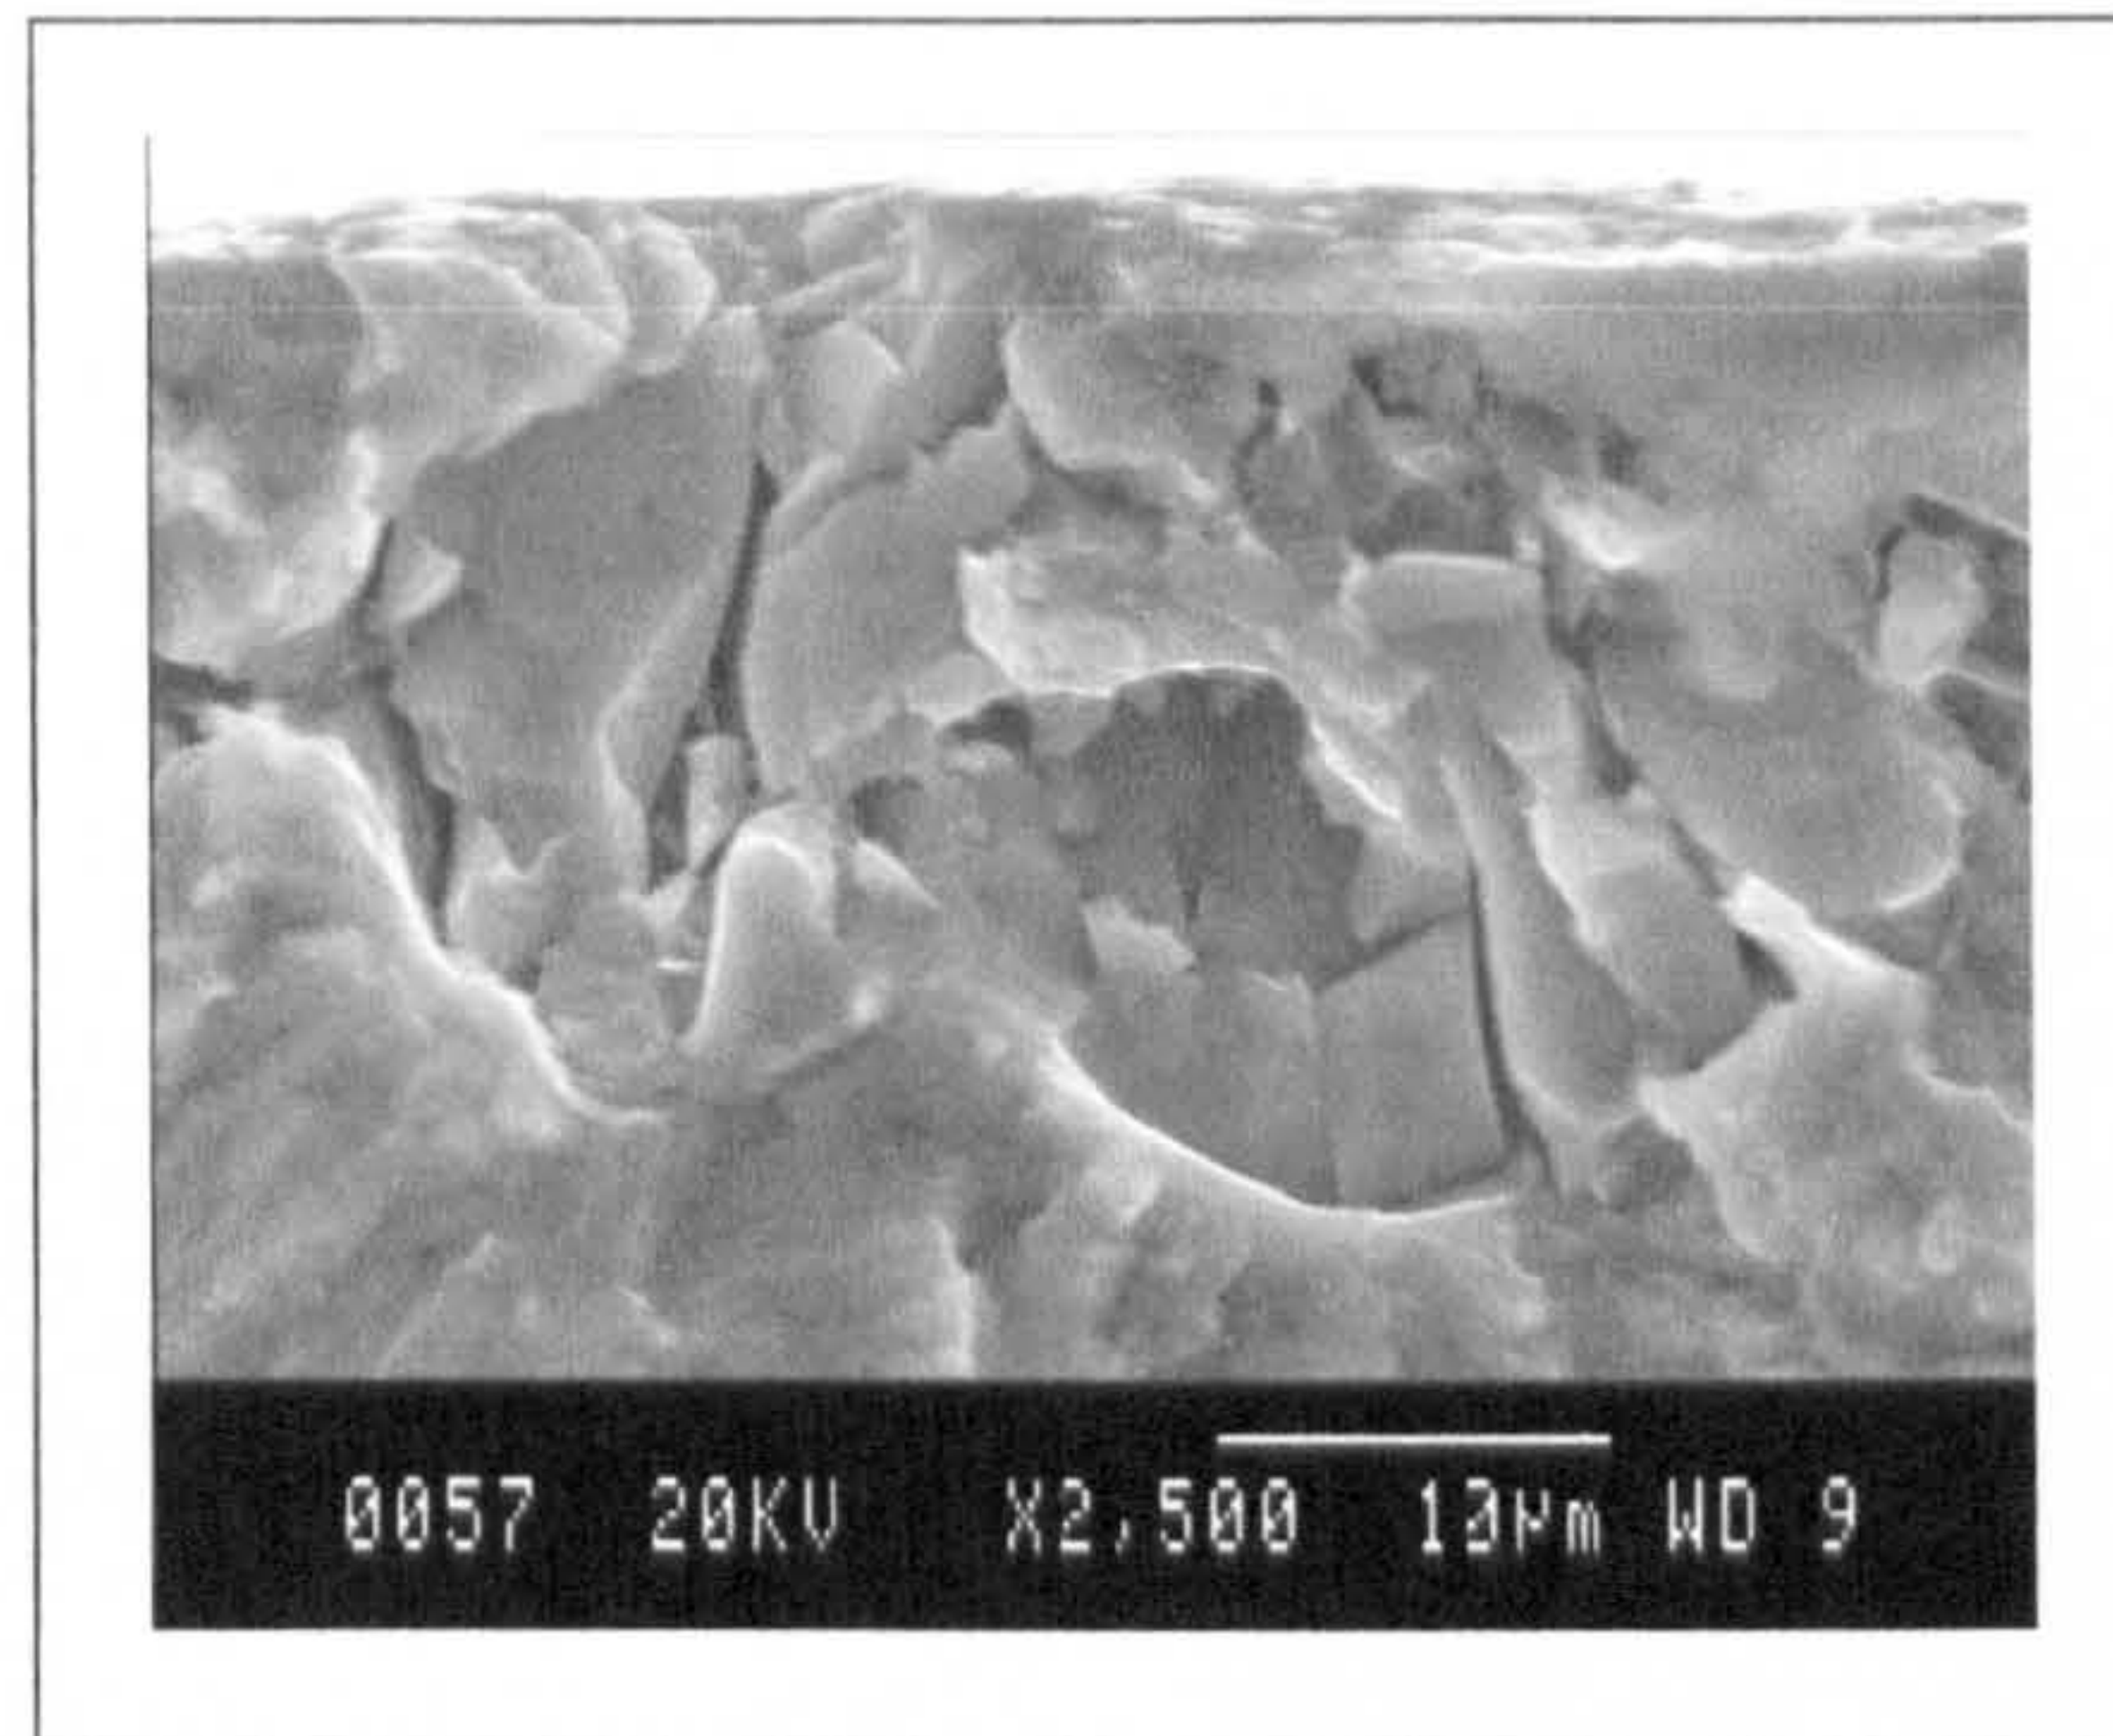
Fatigue crack initiated by an intermetallic phase in a MIG LI small crack specimen.
